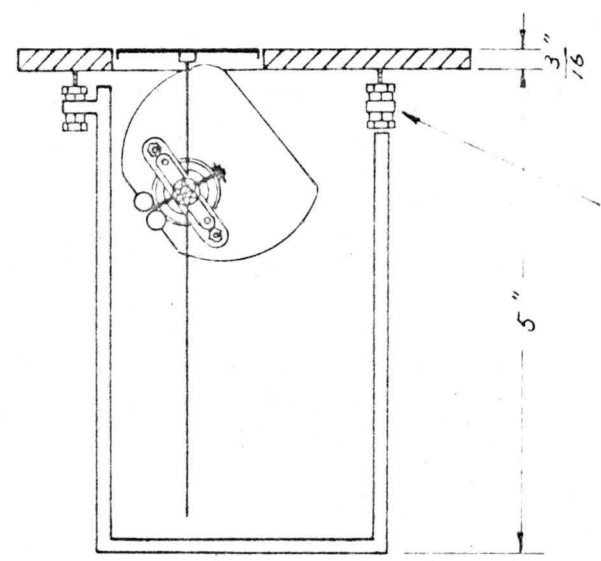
SHEAR - METER : VIEW OF ASSEMBLY
